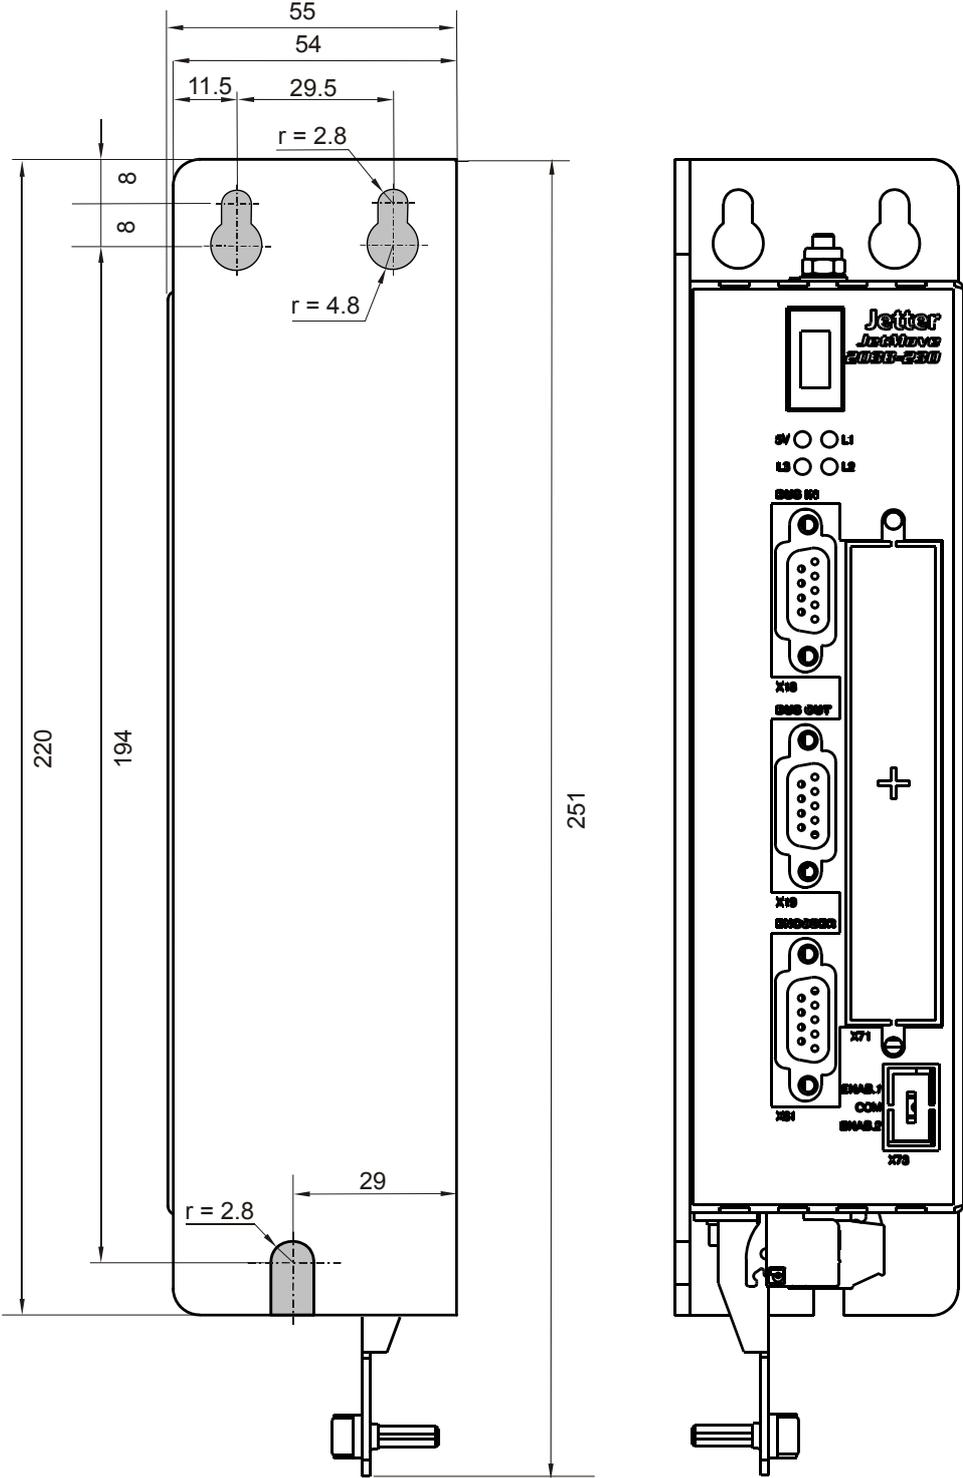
Rear and front view of the JetMove 203B-230 enclosure with mounting holes
